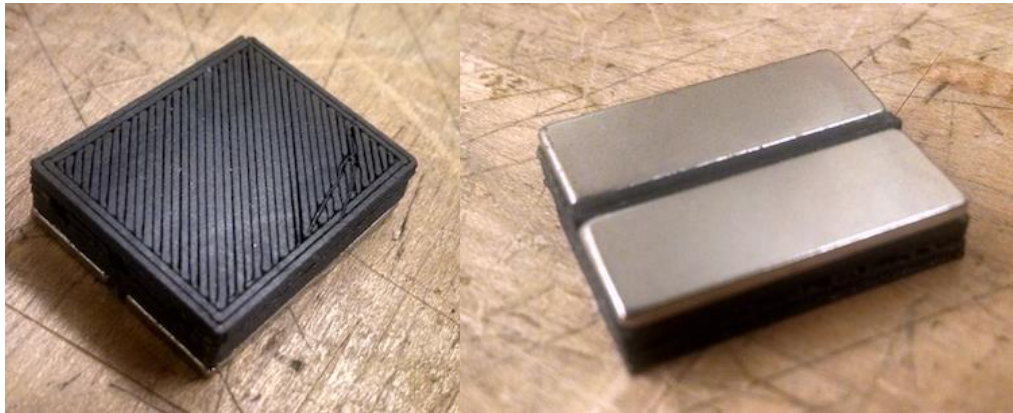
Assembly of magnets in small 3D printed plate v1.2.0
